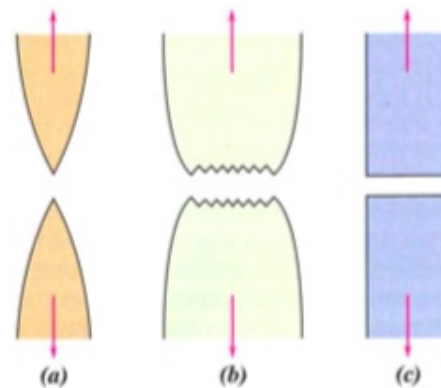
(a) Highly ductile fracture. (b) Ductile fracture with some necking. (c) Brittle fracture with no plastic deformation [33].
